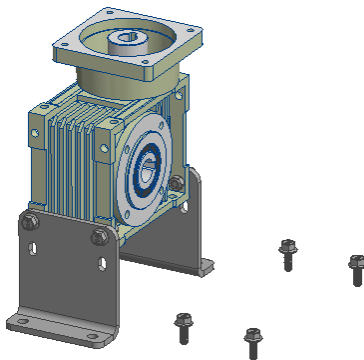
L-bracket alignment and M6 × 20 flange bolt positions
